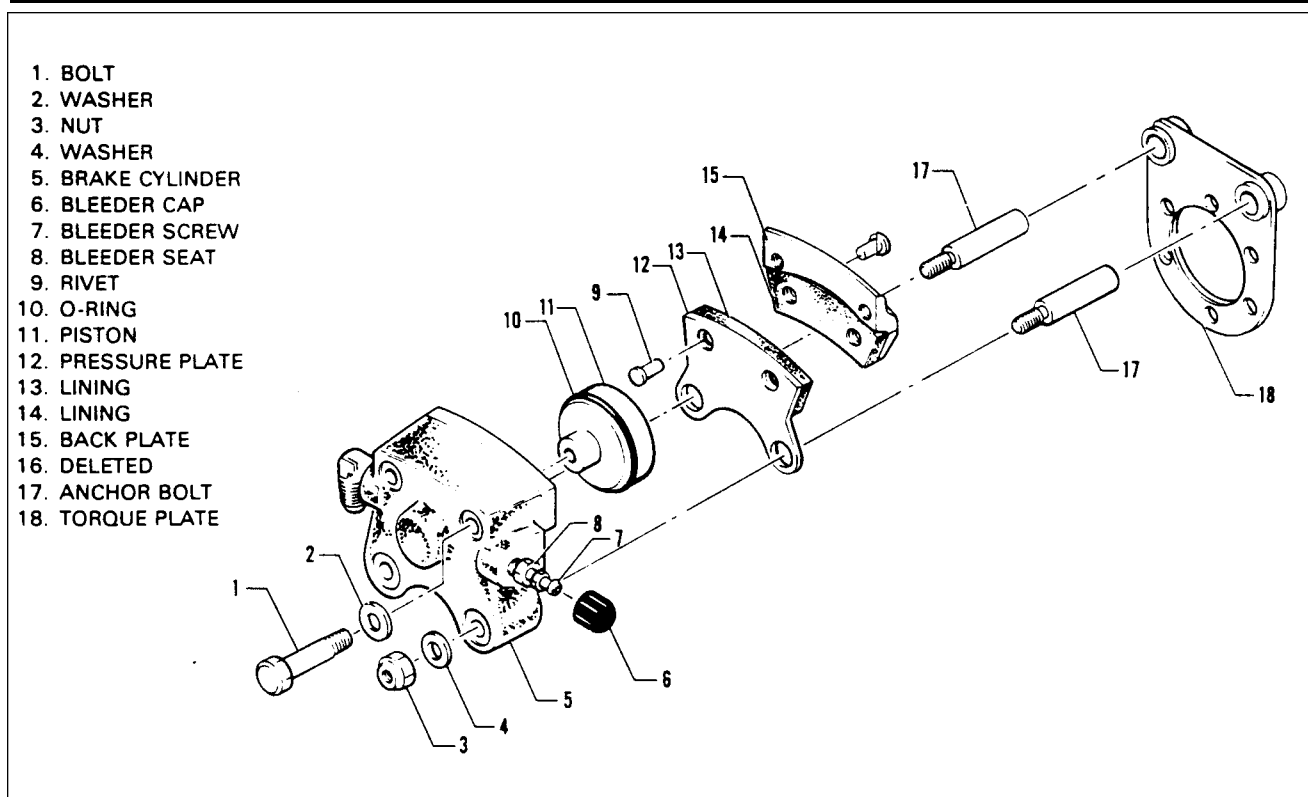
Standard Brake Assembly (Cleveland 30-55)
